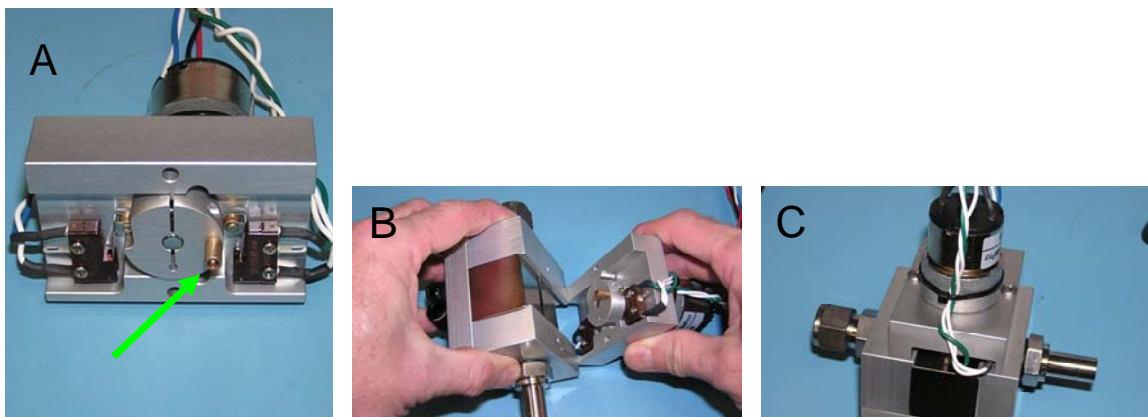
Photographs illustrating the reassembly of the switching valve. The brass bushing must be placed on the motor cam (Panel A) and the diverter block must be positioned so the bushing fits into the slot when the motor plate screws are lined up (Panel B). Once reassembled, the valve (Panel C) can be re-installed in the FDMS module enclosure.
